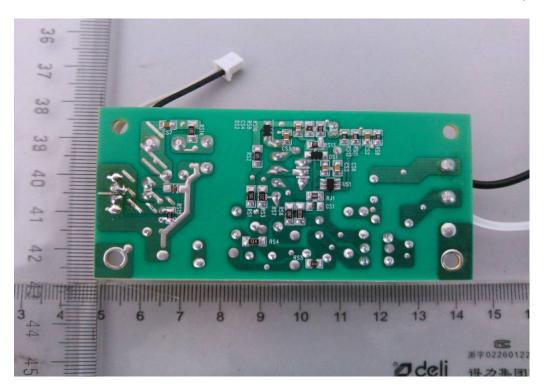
EXTERNAL VIEW - 1 OF MODEL GT-41134-0606-W2-TAB(Third structure)
